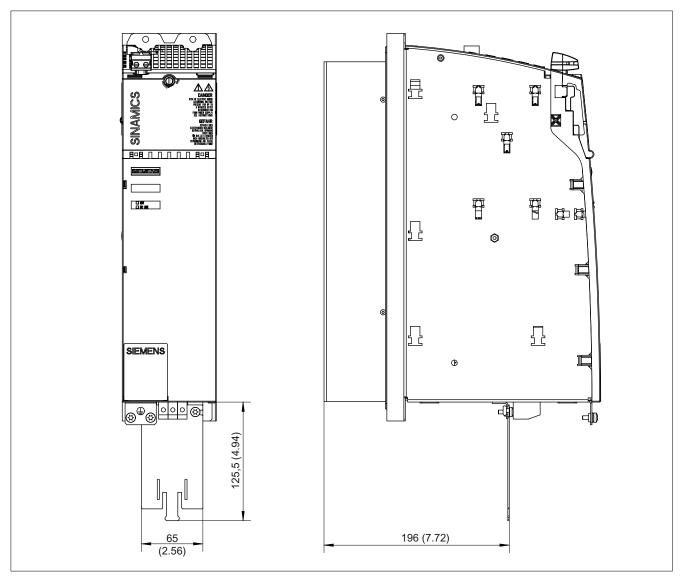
Dimension drawing of shield connecting plate on a 100 mm component with external air cooling, all dimensions in mm and (inches)
